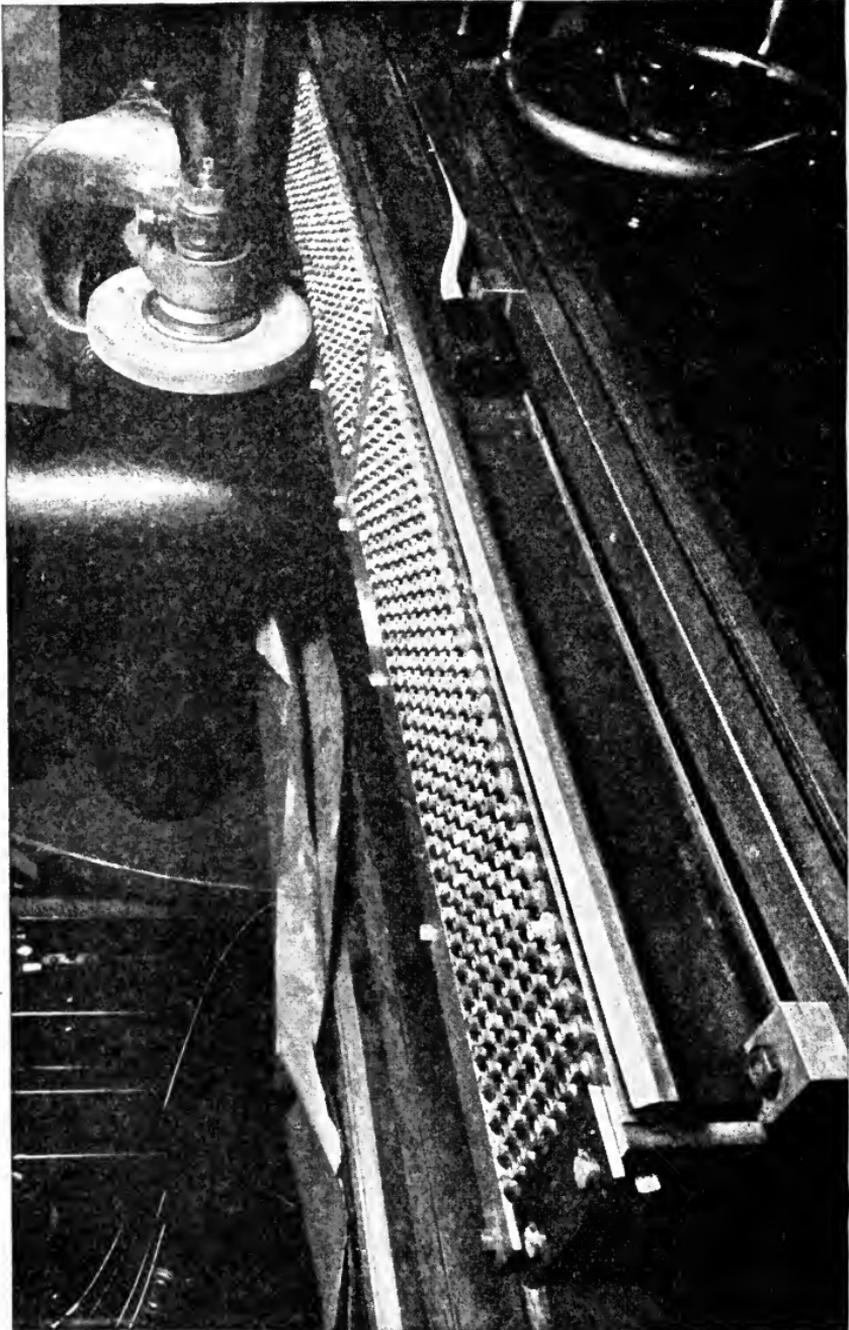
Heald Magnetic Chucks Holding 528 Cones in Place for Grinding. With Ordinary Methods of Holding Work, Time Required 5 Hours; with Magnetic Chucks, Job Done in 1 $\frac{1}{4}$ Hours
